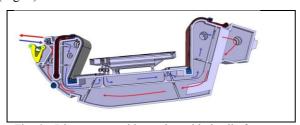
Divertor assembly section with detail of cassette section and cassette cooling path.
